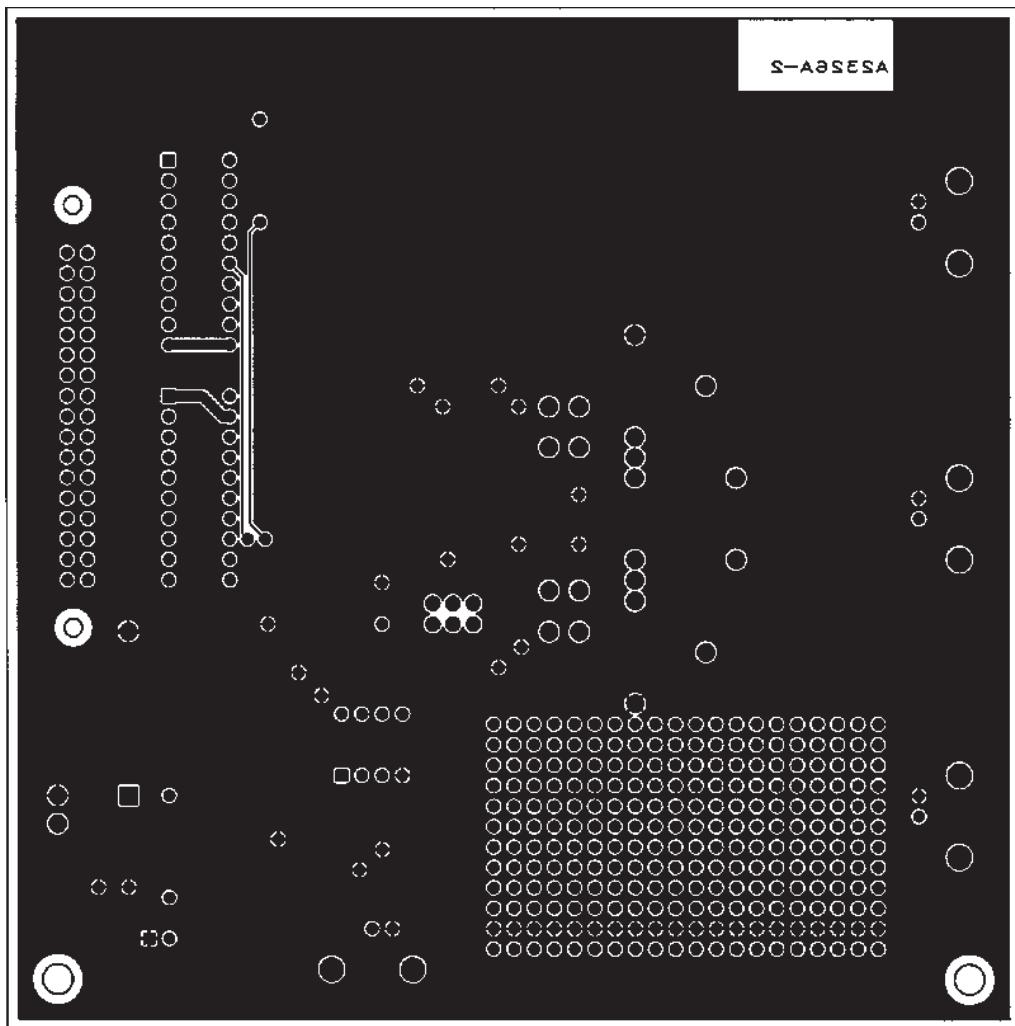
Bottom Layer of DEM-DDC112U-C DUT Board
